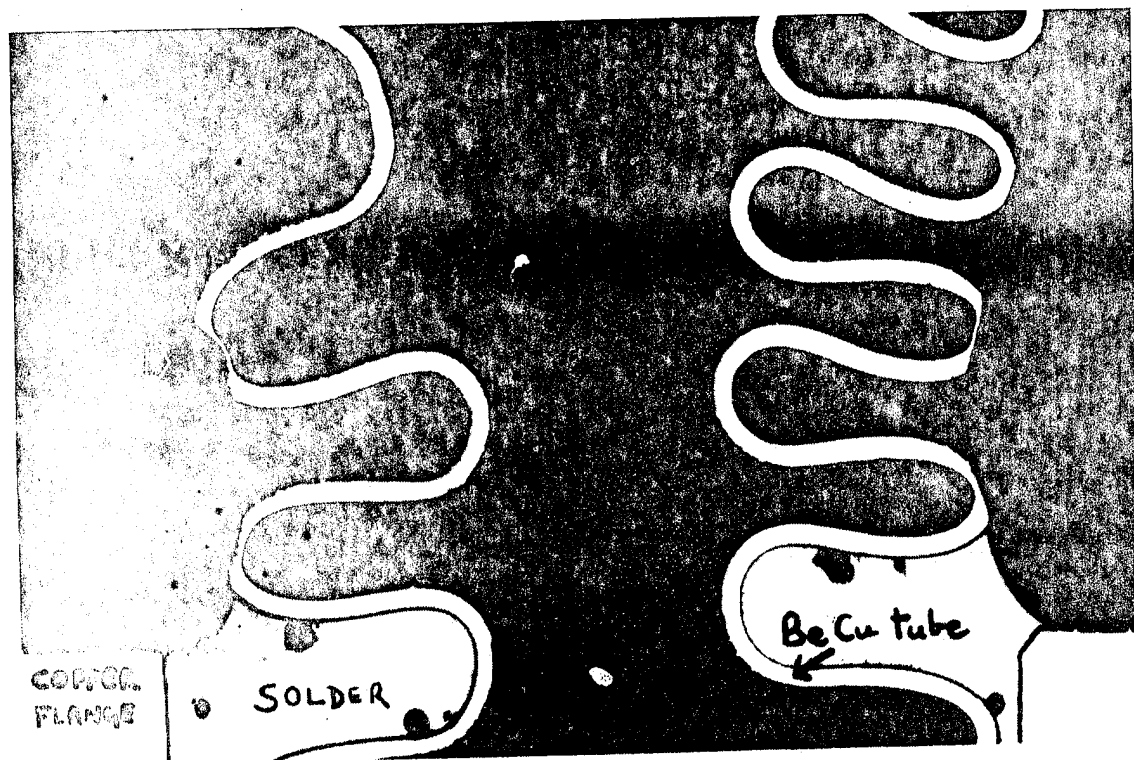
Full cross-section of defective region showing solder fillet and location of pin-hole (arrowed).
